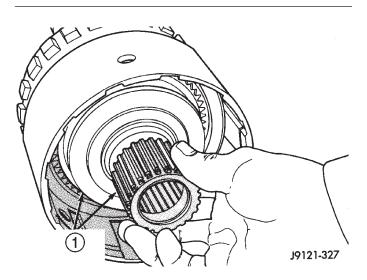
Sun Gear Installation 1 – SUN GEAR AND SPRING PLATE ASSEMBLY
